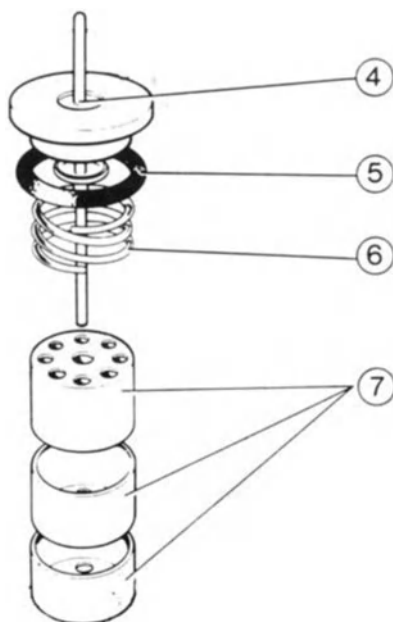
Electrode assembly of the Edwards High Vacuum International cold cathode gauge type CP25K. (4) Anode assembly; (5) 'O' ring; (6) spring; (7) cathode cups.
